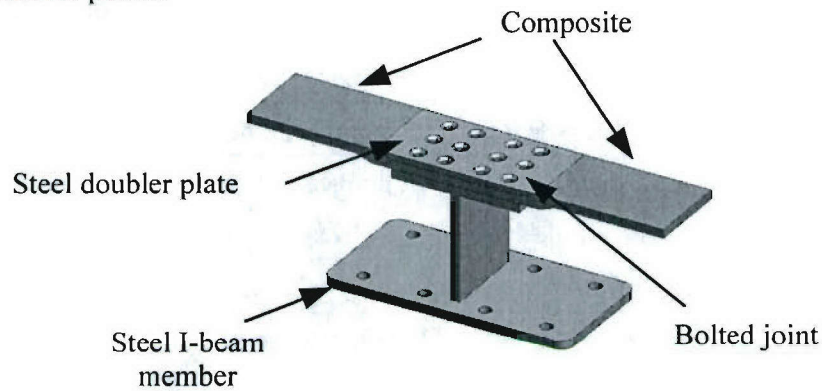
Schematic of the Bolted Joint with Doubler Plate Concept
